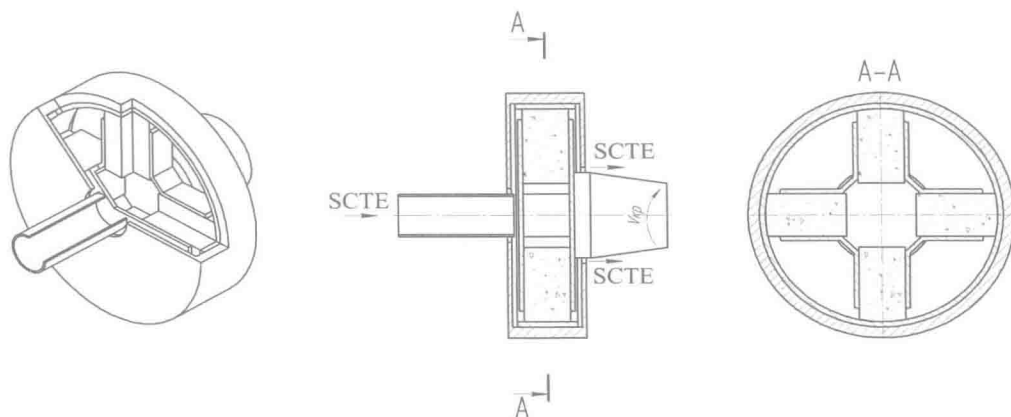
The method of centrifugal grinding with the help of the tool with prefabricated radial sliding abrasive segments
